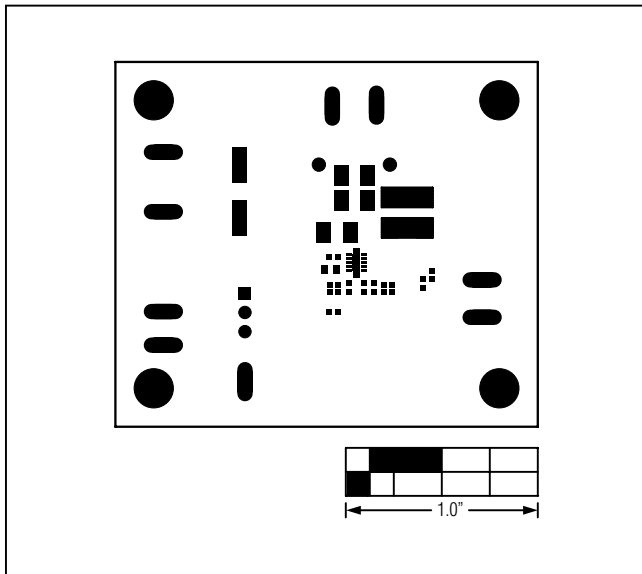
MAX17501H EV Kit PCB Layout—Top Solder Mask
